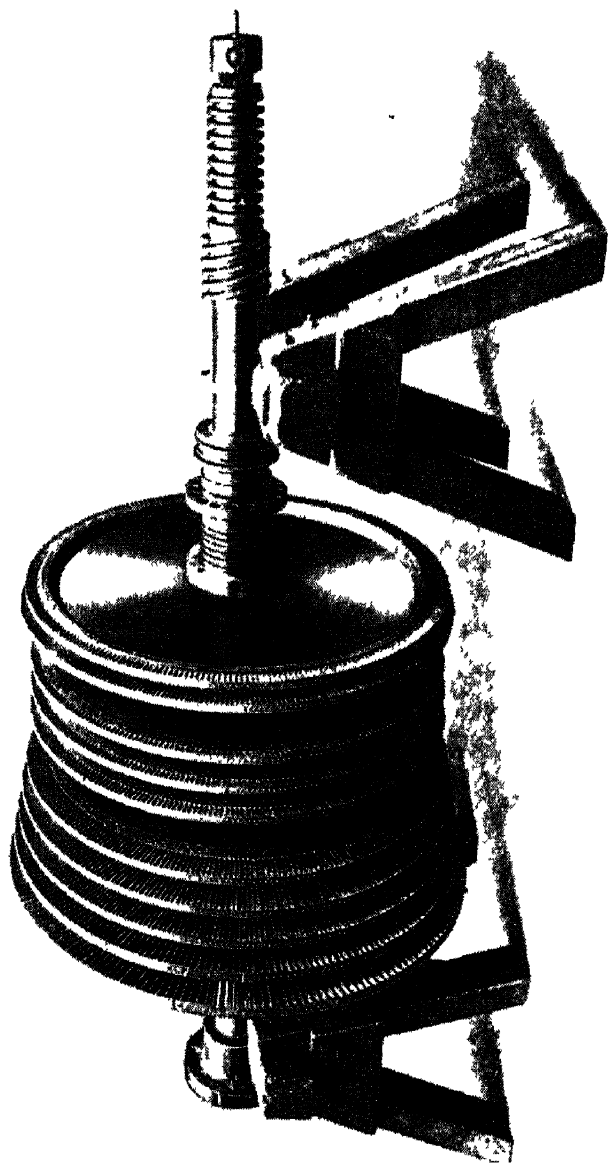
TURBINE ROTOR SHOWING SPINDLE DETAILS
